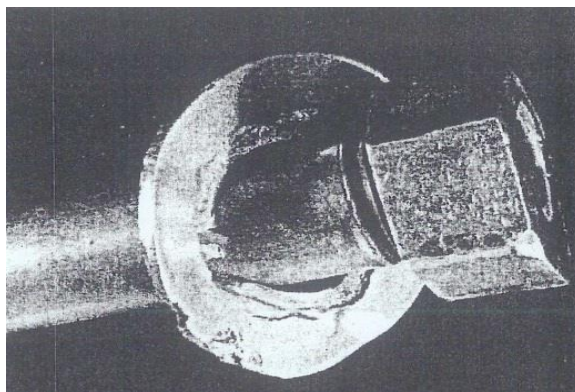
Crevice corrosion at a metal-to-metal crevice site formed between components of type 304 stainless steel fastener in seawater [23].
